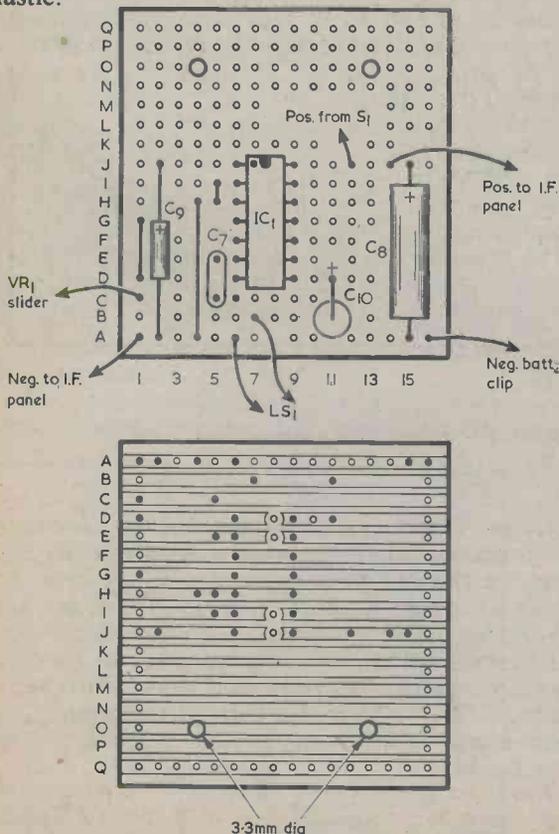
The a.f. amplifier board. This is bolted to the main component board.
